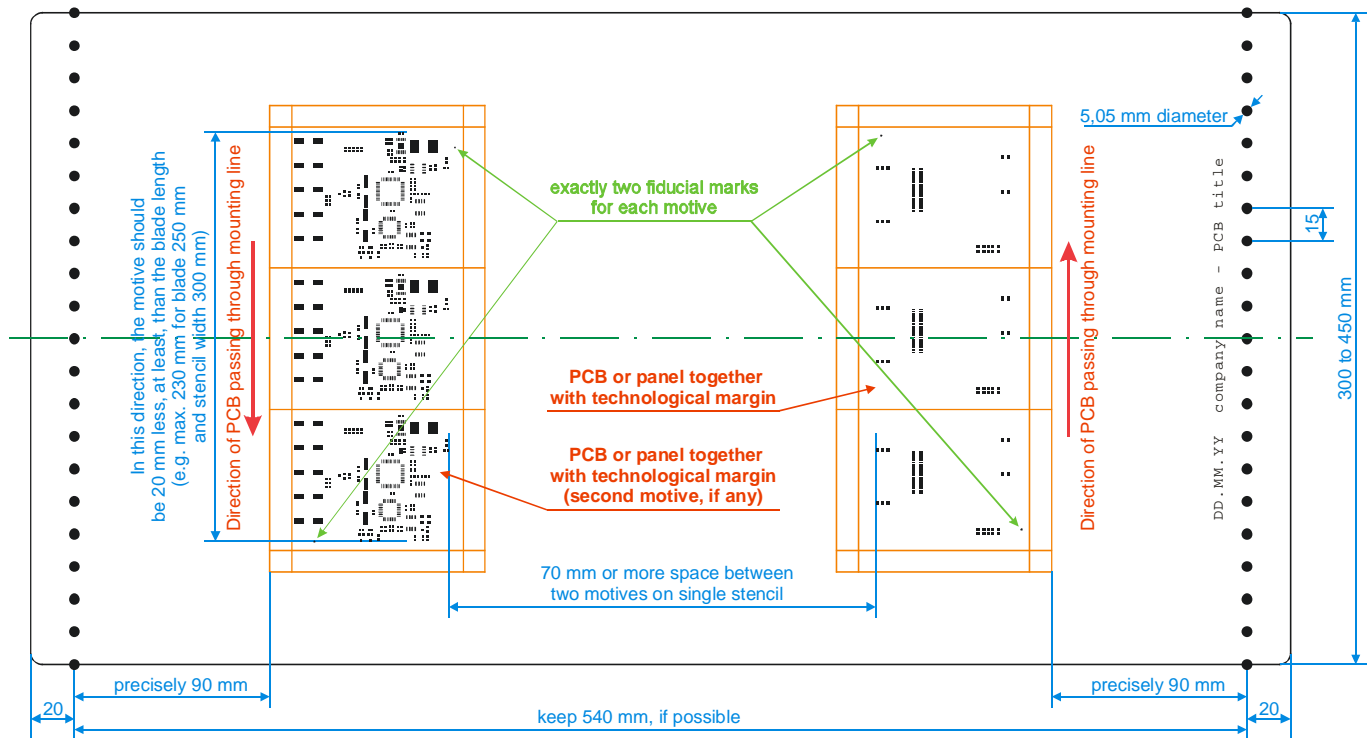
Stencil - dimensions, fixing holes and positions of motives
